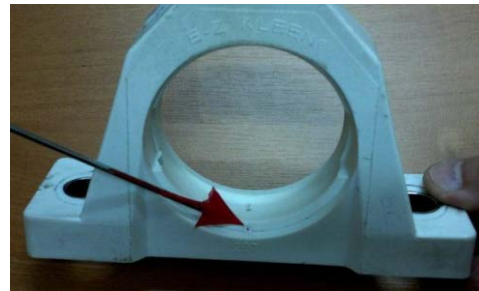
The photo with indicated location of thermocouple ($T3$) in the housing of the bearing
